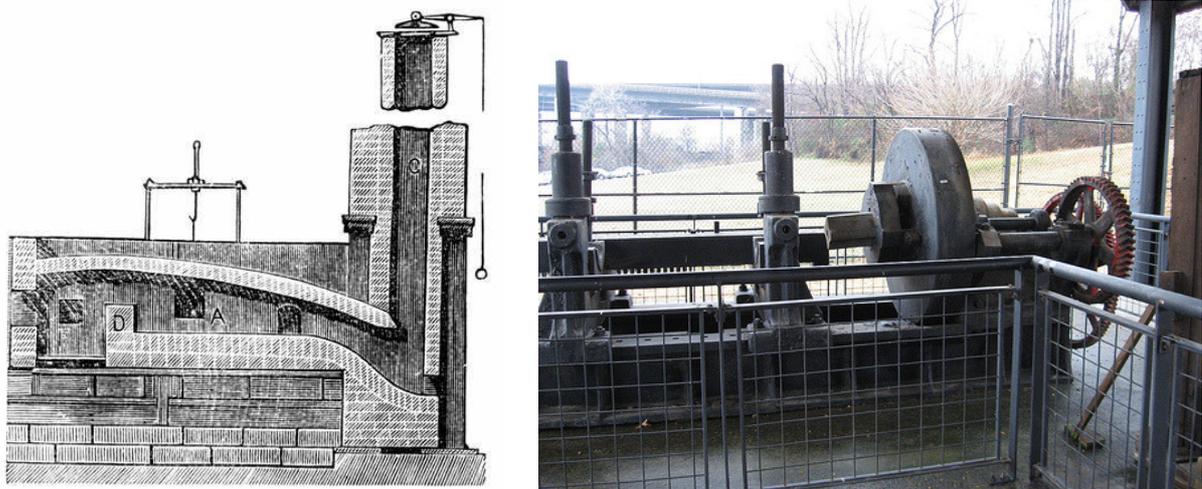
Iron puddling furnace and iron rolling mill for beam manufacture [43].
